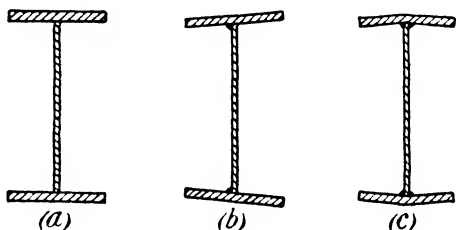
DEFORMATION OF PLATE GIRDERS DURING WELDING
